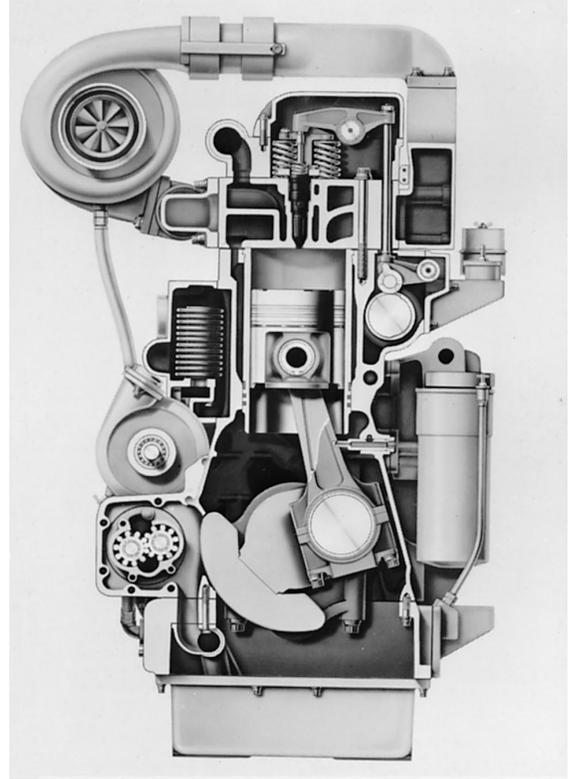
Cummins model KT 450-hp turbocharged, four-stroke diesel engine.
